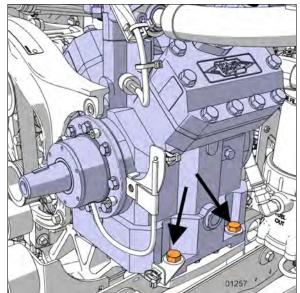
COMPRESSOR MOUNTING BOLTS
